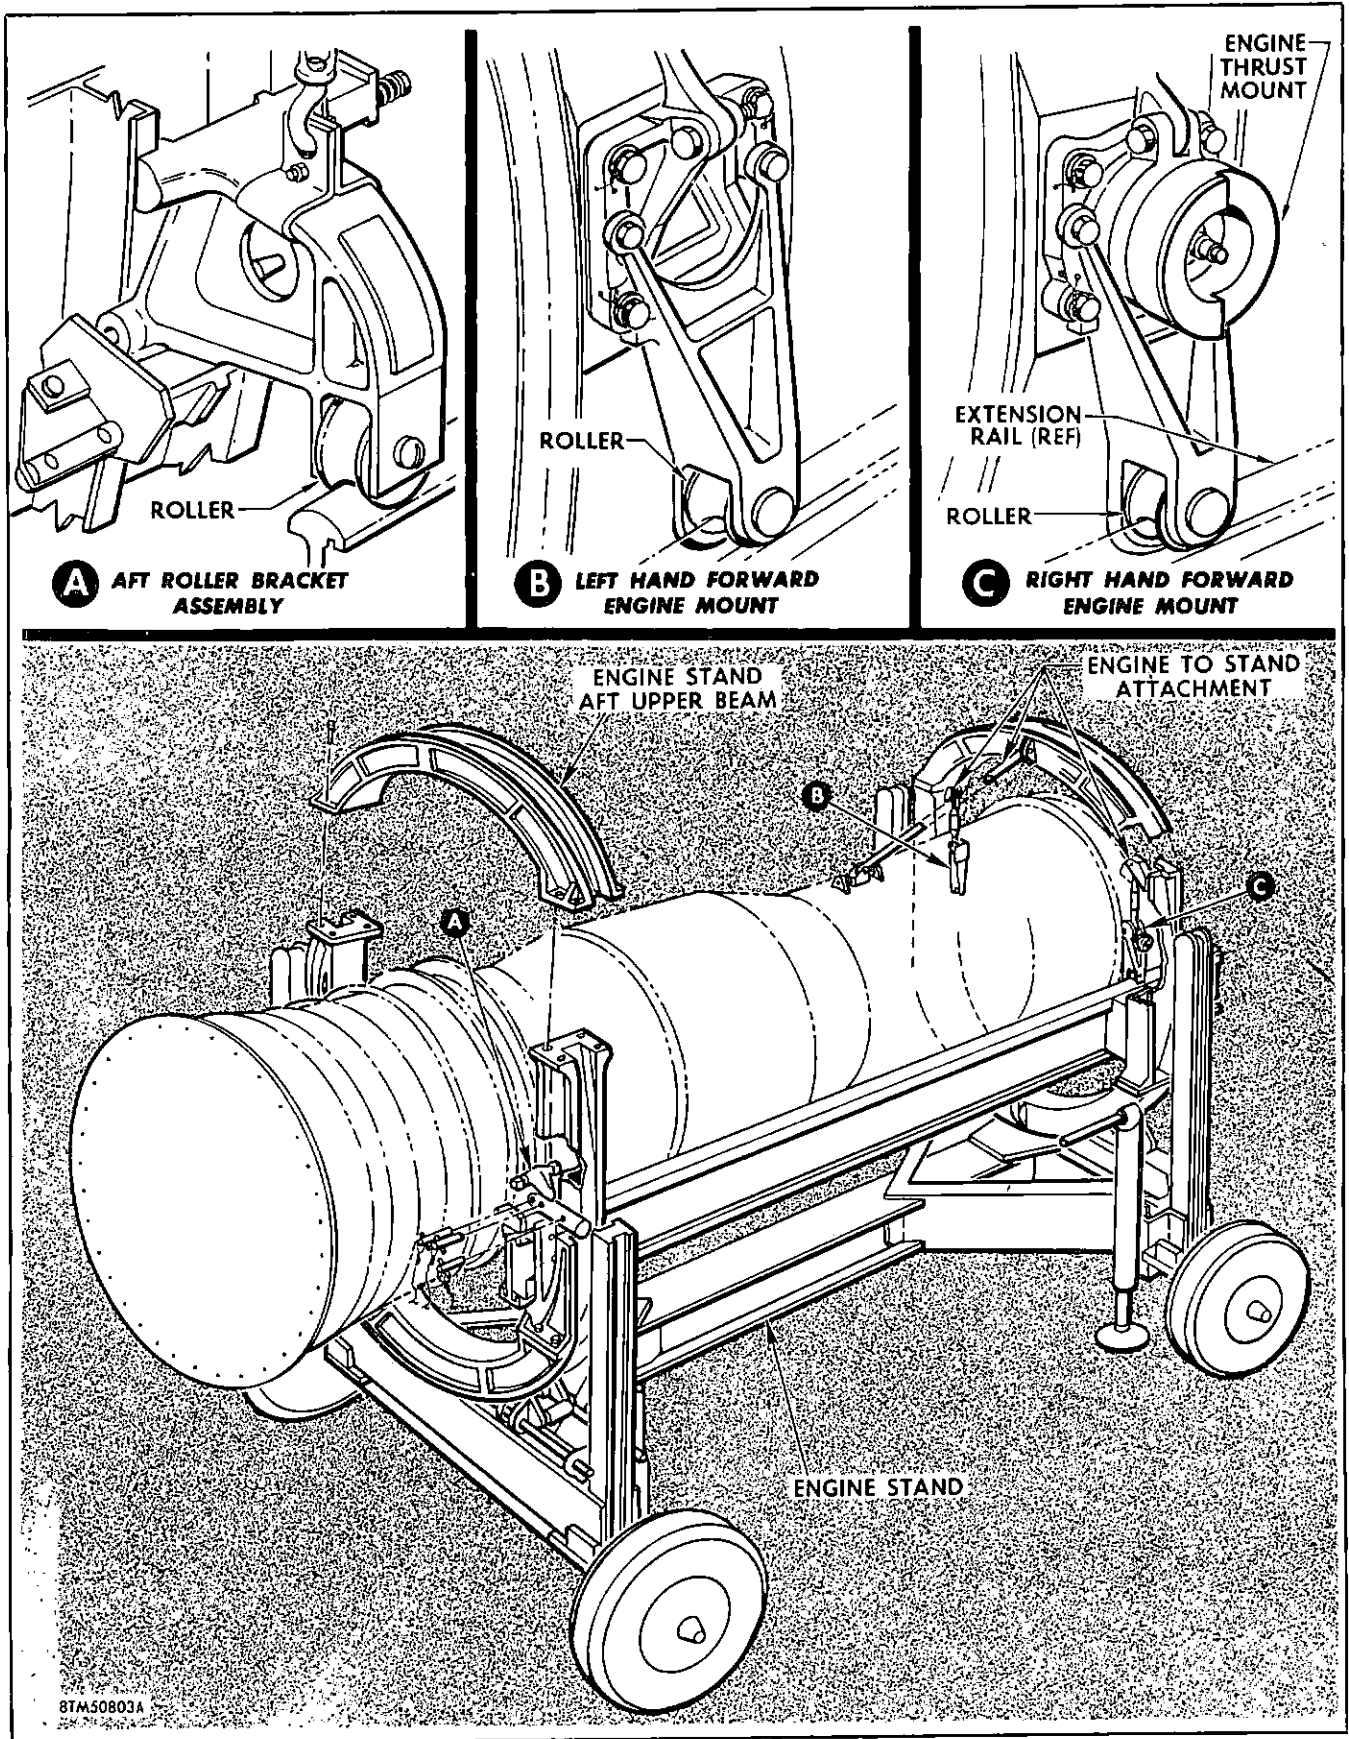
Preparing the J57 Engine for Engine Build-Up
